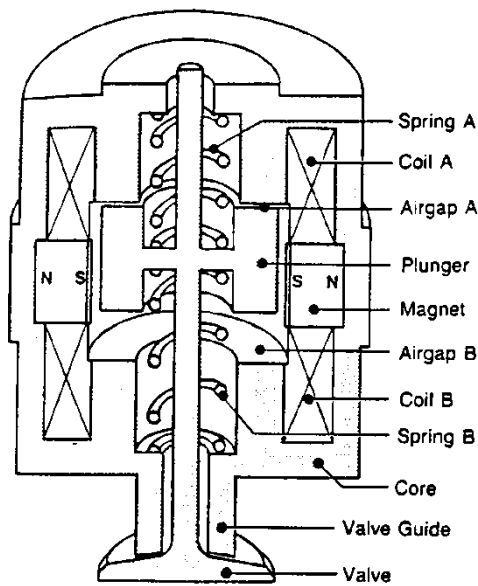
Cross-section of GM's electromechanical valve actuator [35].
